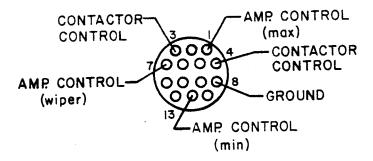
B Rear View of Power Supply Control Cable Plug (P9)
